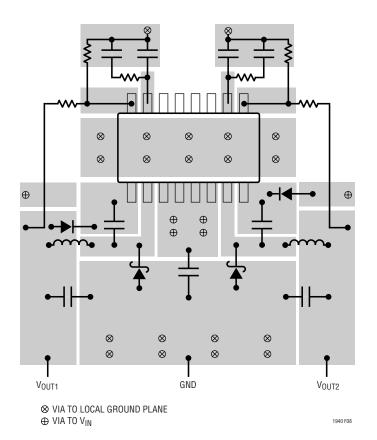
A Good PCB Layout Ensures Proper Low EMI Operation
